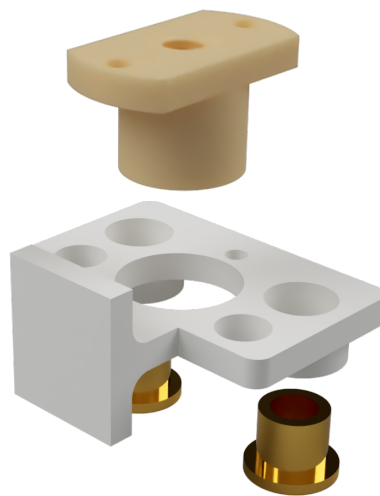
Middle plate with threaded nut and oil impregnated brass bearings
